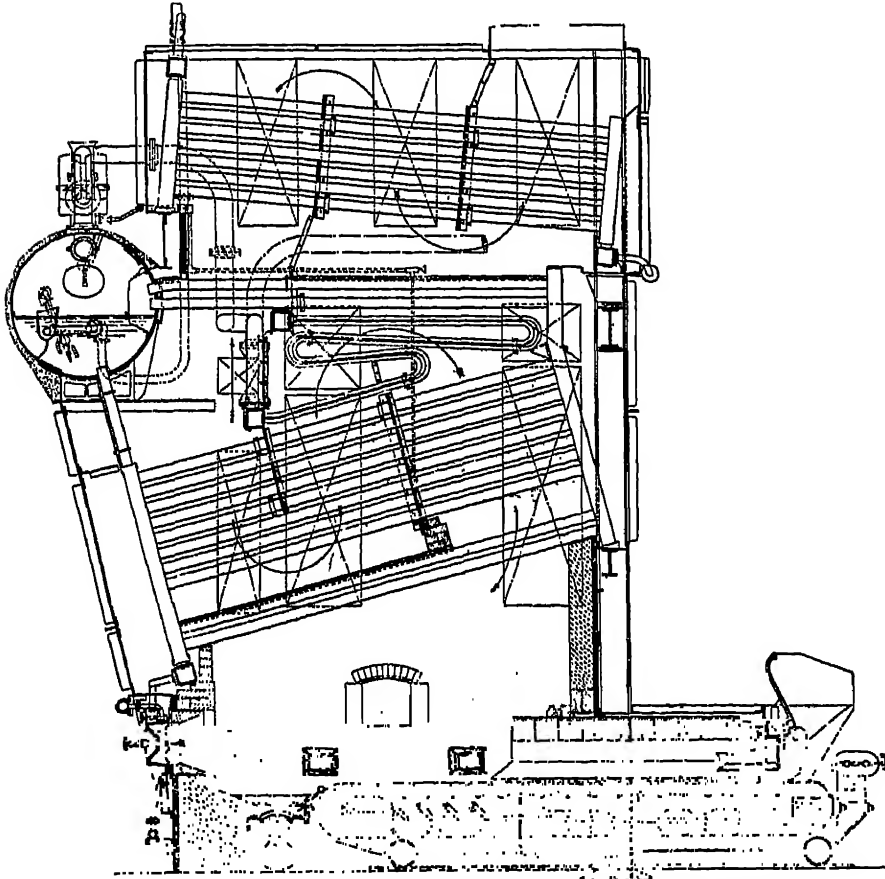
Marine-type Boiler (for land purposes) fitted with Superheater, &c., and Oil Firing
